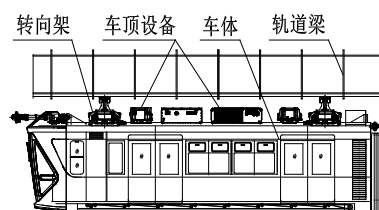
Schematic diagram of roof equipment layout for suspended monorail
